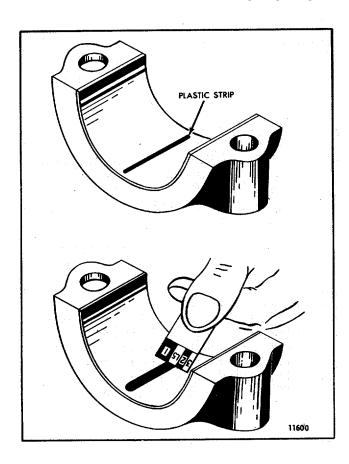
Using Plastic Strip to Measure Bearing-to-Crankshaft Clearance
